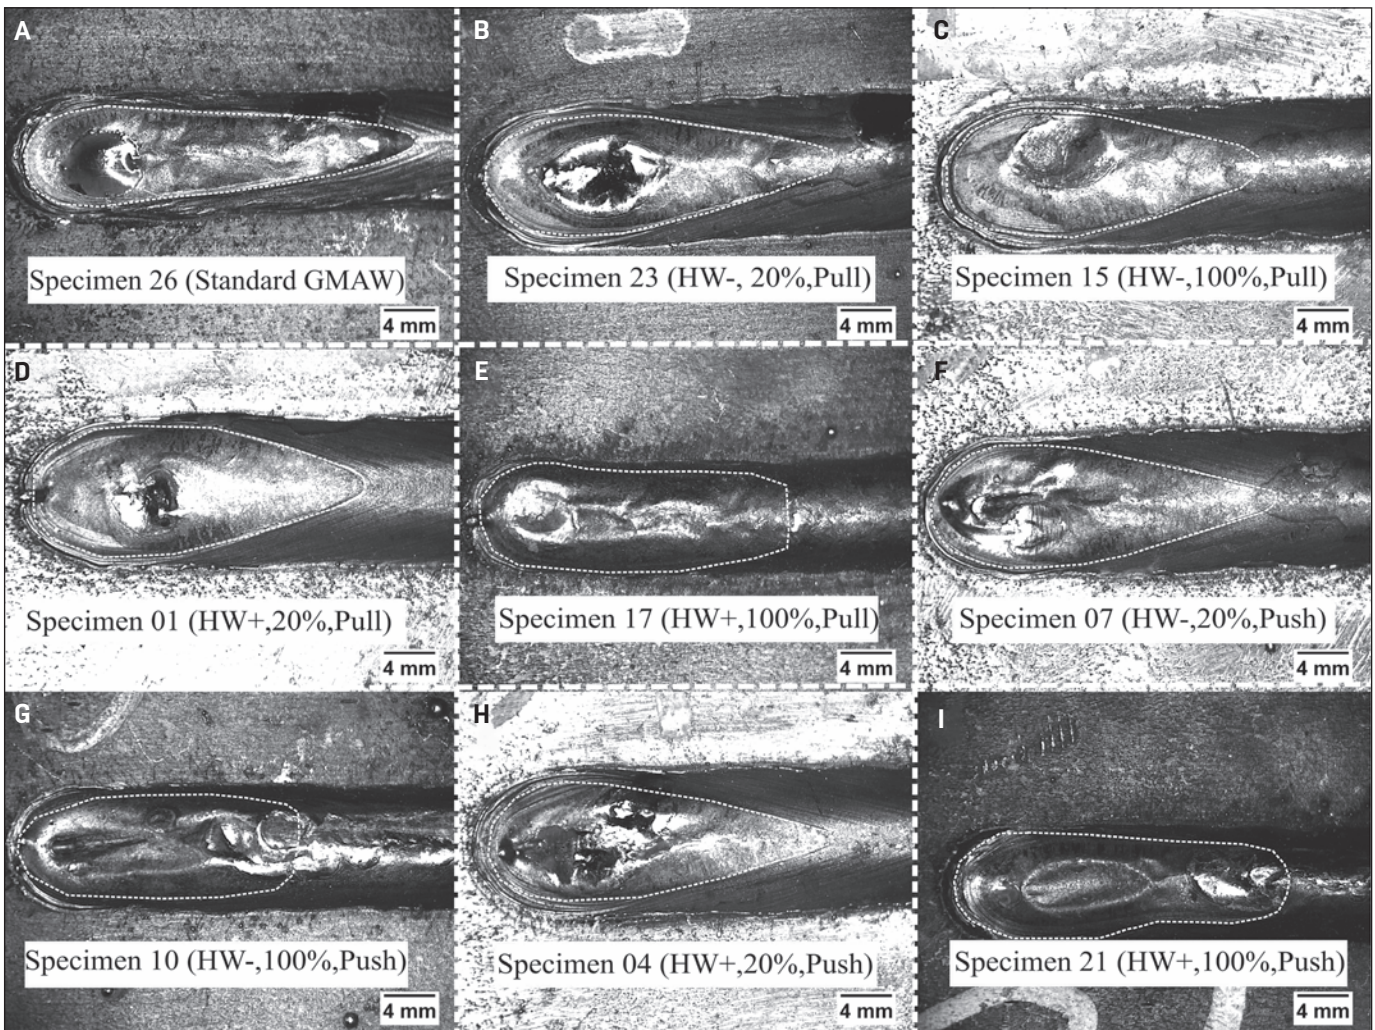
Representative bead aspects for these produced welds: A — Standard GMAW; B-I — HW-GMAW. For all the conditions WFS = 350 in./min, U = 28 V, TS = 25 in./min, and CTWD = 17 mm. Hot-wire feeding is 20% (124 in./min) and 100% (622 in./min).
